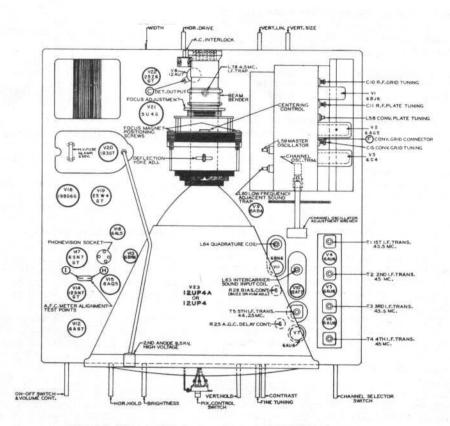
Tube and Trimmer Layout 23G22/23 Chassis.
